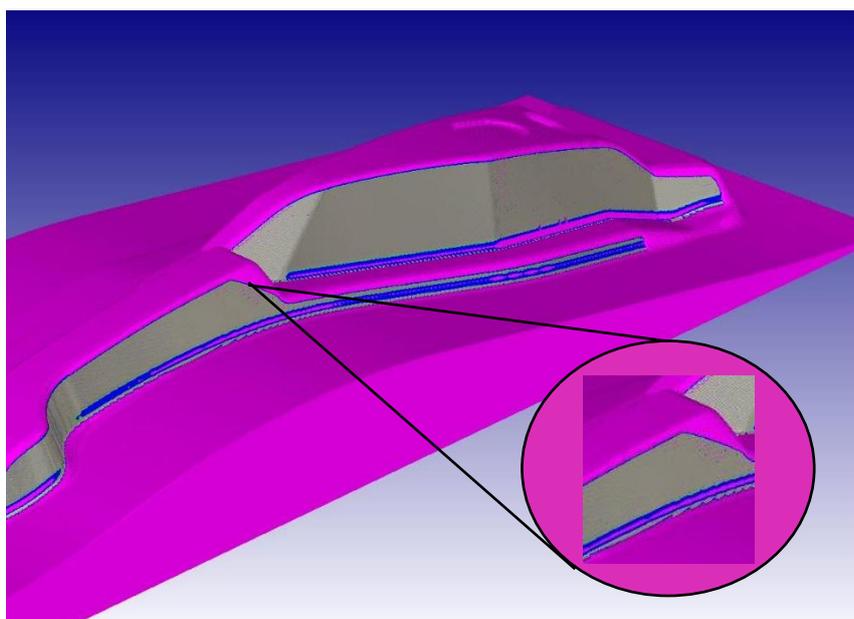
Finishing simulation with a 5-axes conical barrel cutter CNC machine.
